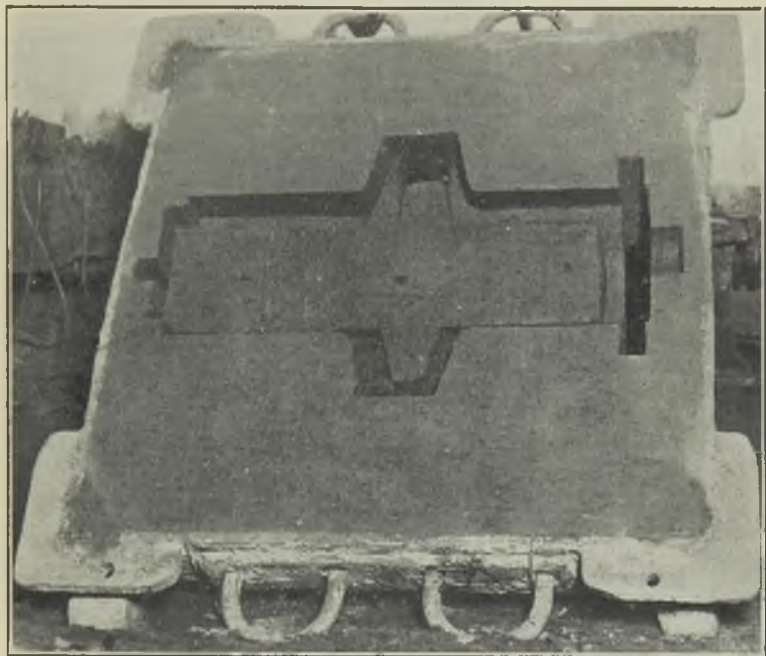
COPE OF MOULD FOR TURBINE-PUMP FRAMING.
